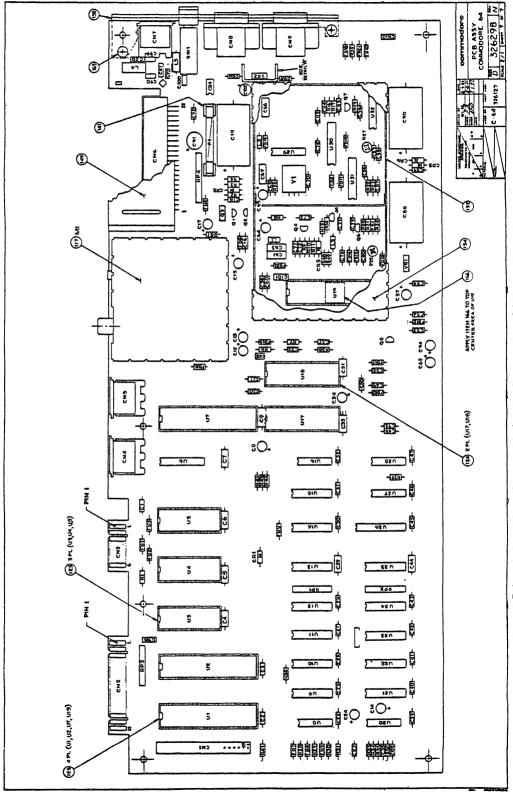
Printed circuit board assembly for the Commodore 64 (Reproduced by courtesy of Commodore Business Machines (UK) Ltd).
